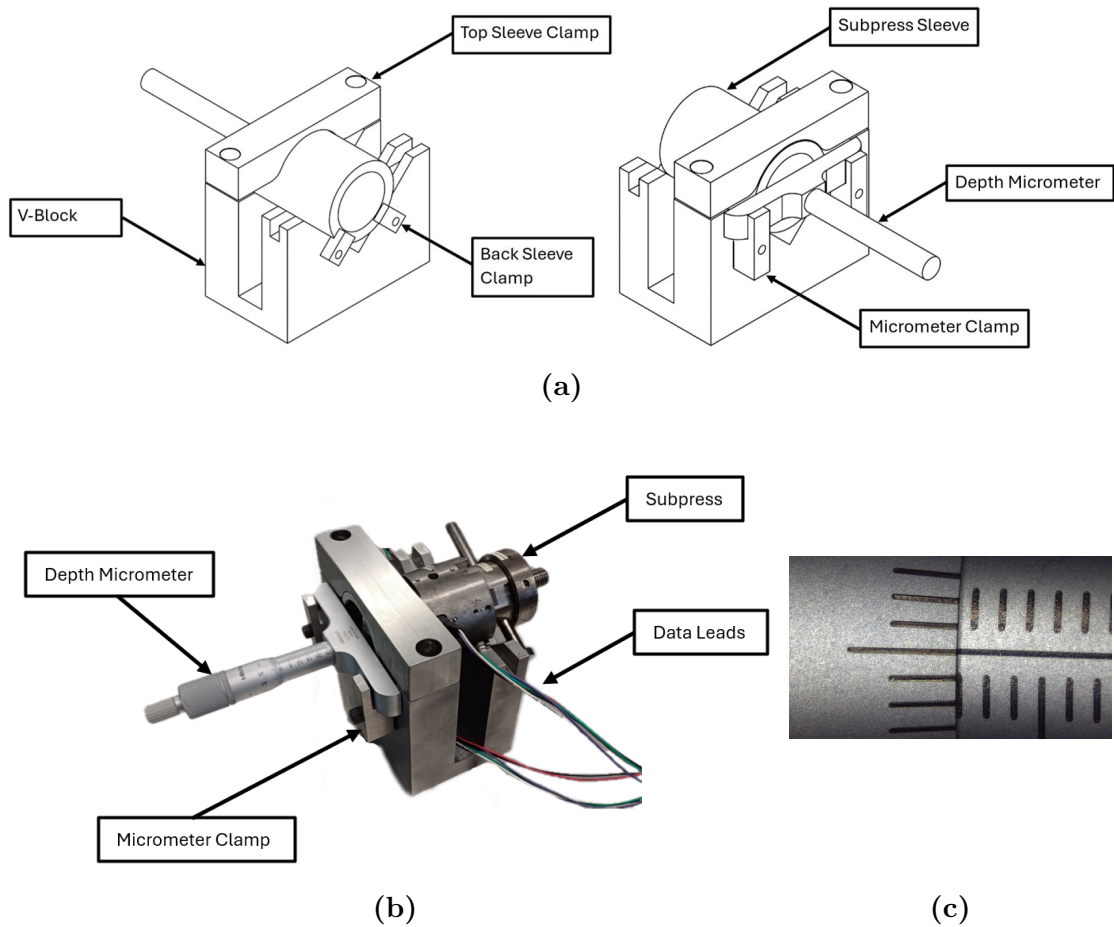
The commissioning test set-up with (a) A schematic of the mounting fixture design, (b) A view of the calibration set-up as would go under the microscope, and (c) A typical image captured of the depth micrometer dial by the microscope.
